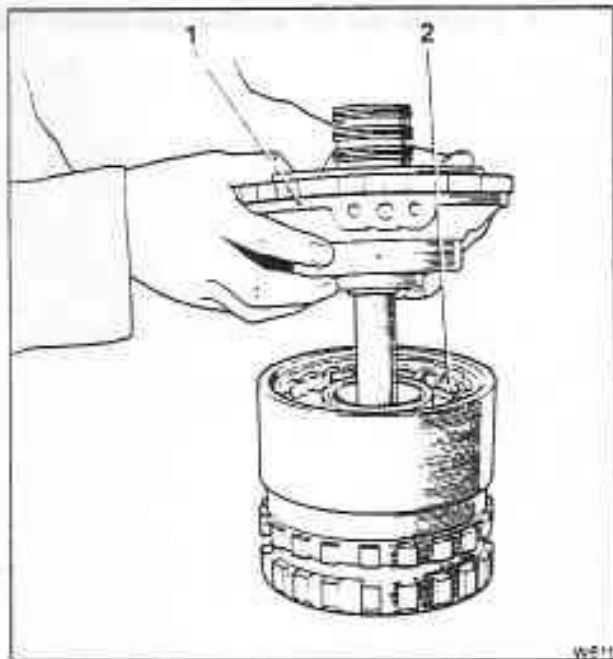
Fitting the centre support into the reaction carrier (roller clutch)
